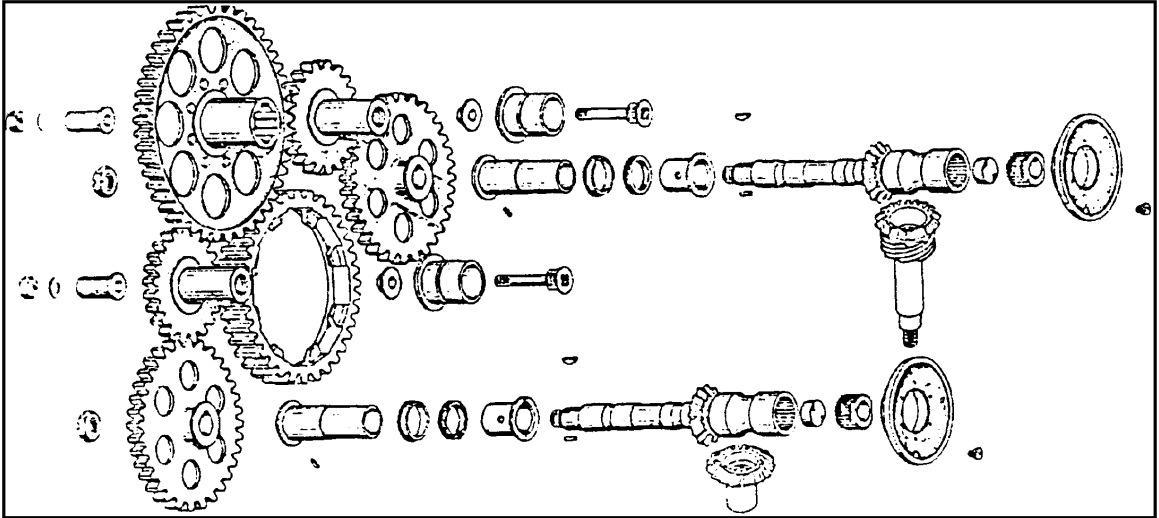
Magneto, Oil Pump, and Tachometer Drives
